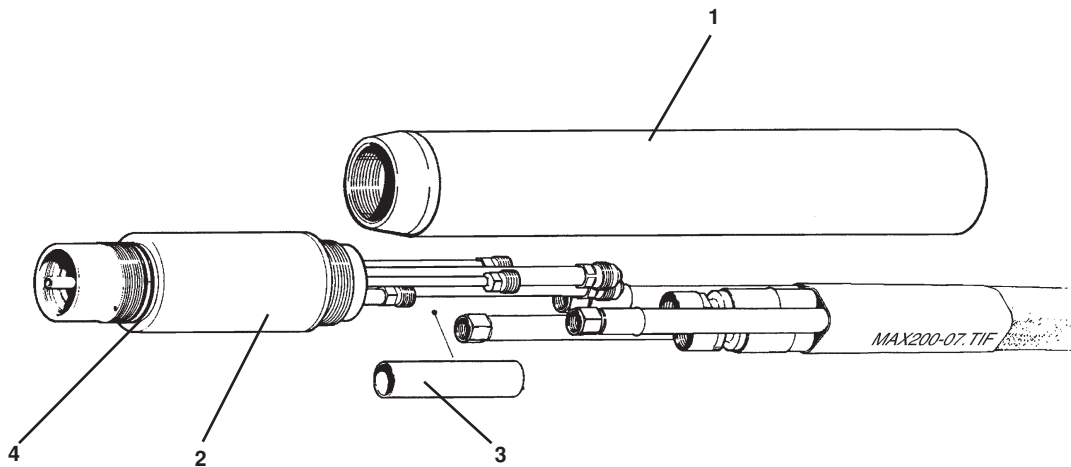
MAX200 Machine Torch Assembly (Standard)
